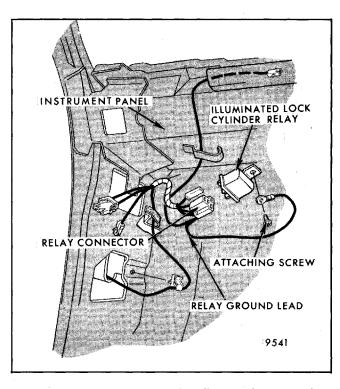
Illuminated Lock Cylinder Relay Assembly
